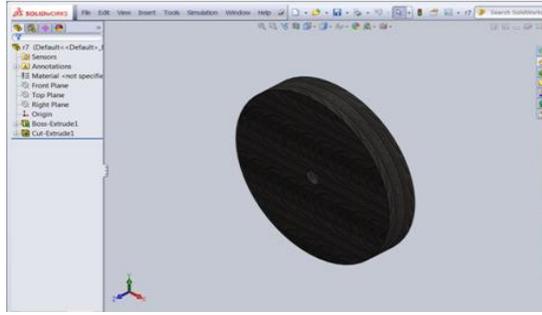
The exploded view of the stair-climber Wheel Bush.
